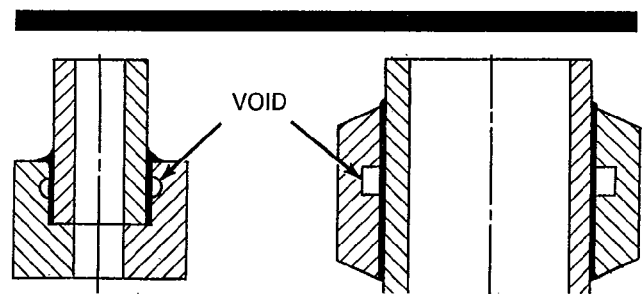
Brazed Joints with Grooves for Preplacement of Filler Metal; After the Brazing Cycle the Grooves are Void of Filler Metal
